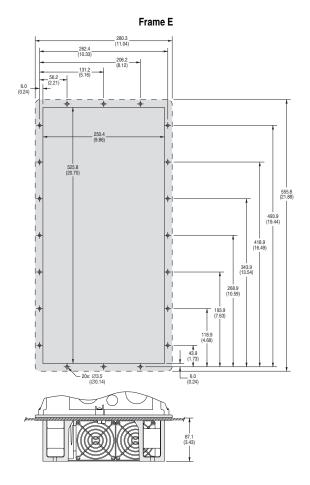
VTAC 9 Frame B...E Flange Mount Cutout Dimensions
